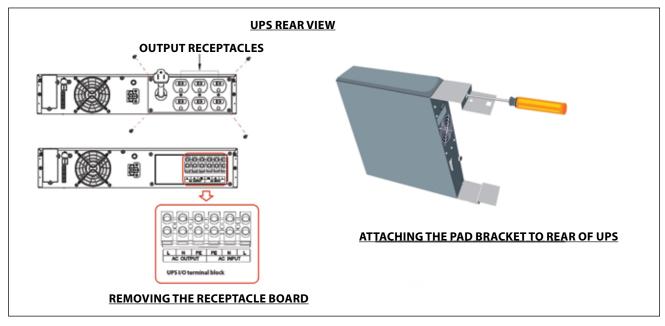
Attaching PAD securing brackets to rear of UPS and Removing the Receptacle Board
